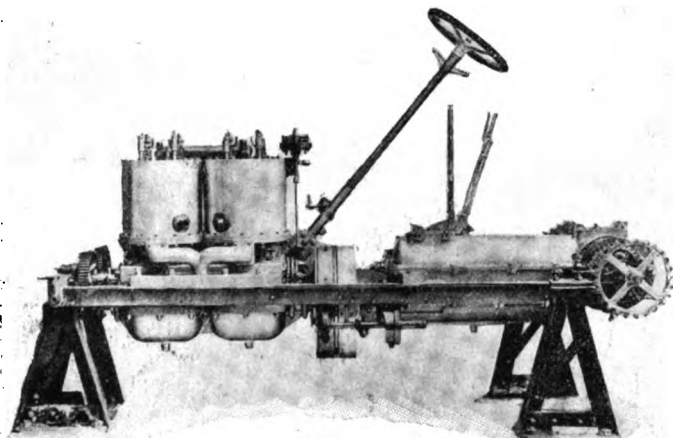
The Engine and Gear Box of the new 24-28 h.p. Burlington Car.
